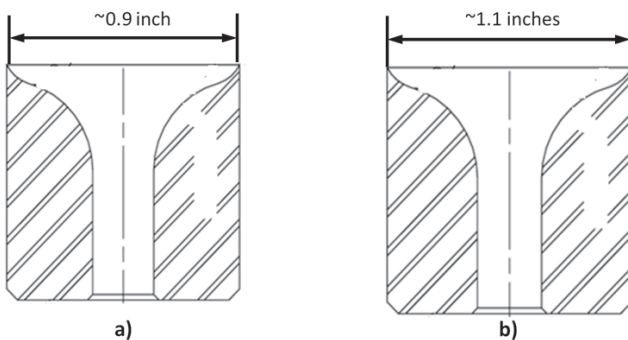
(a) extrusion die with smaller diameter; (b) extrusion die with larger diameter
